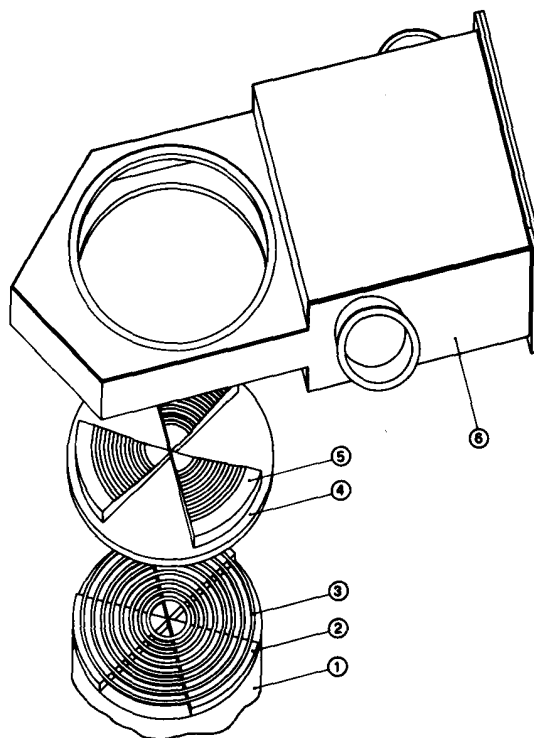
Exploded view of pole-tip assembly and vacuum tank. 1) lower pole of magnet, 2) shallow sectors, 3) trimming coils, 4) circular iron plate supporting the inner sectors, 5) inner sectors, 6) vacuum tank with pumping ports.
